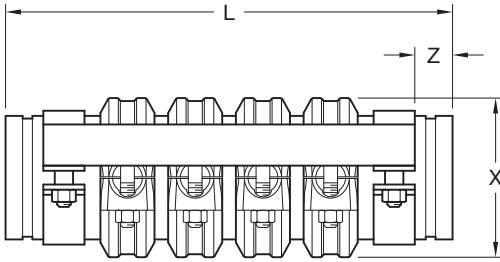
Expansion JointNominal Dimensions For End Elevation View
